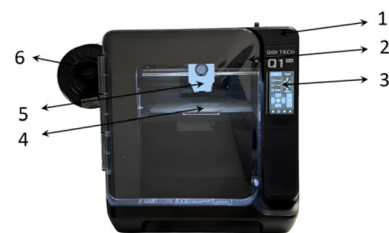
QIDI Q1 Pro 3D printer: 1 – frame, 2 – access door, 3 – control display, 4 – platform, 5 – print head, 6 – filament spool.
